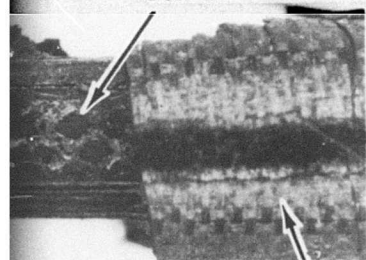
Concept I - Subscale Static Specimen Detail Failures.
